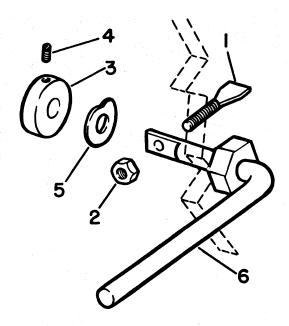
MICROSWITCH ACTUATOR ASSEMBLY-EXPLODED VIEW
